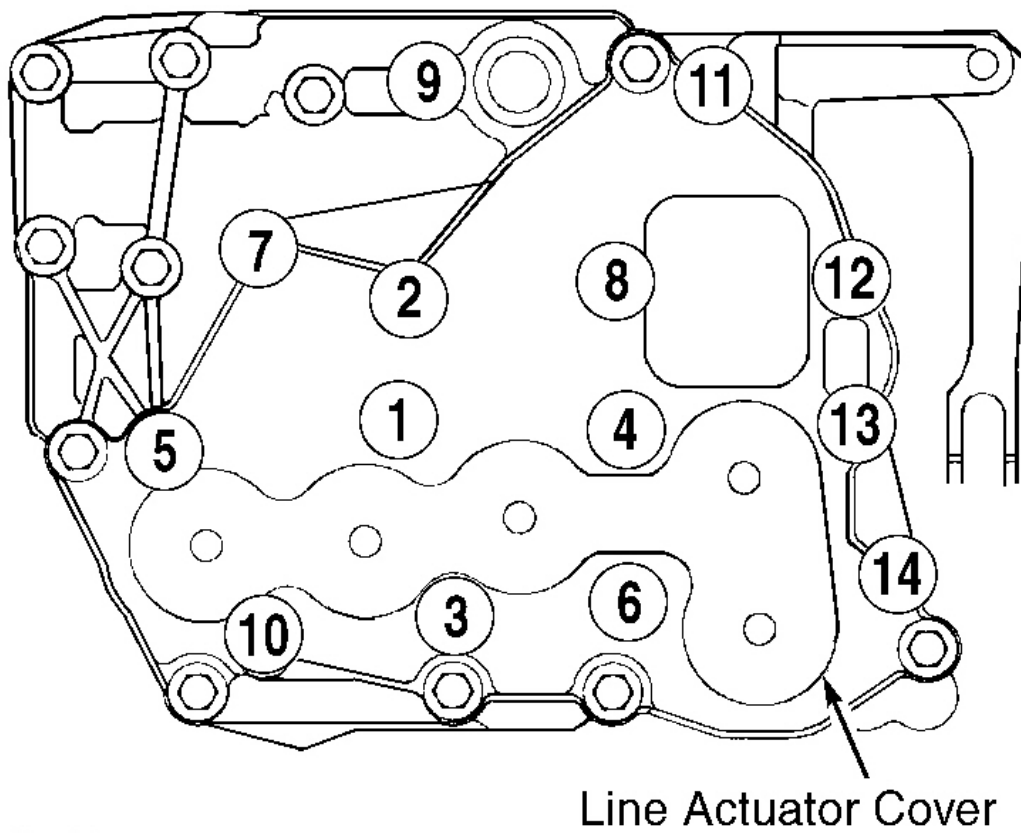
Line Actuator Cover Bolt Tightening Sequence
